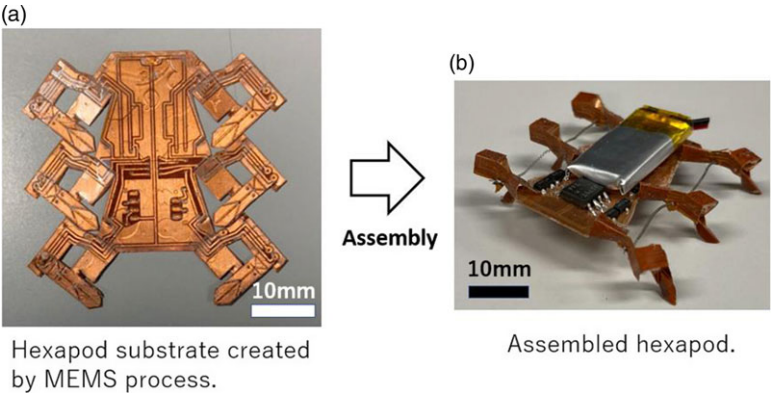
SU-8 board assembly. (a) SU-8 board (b) Assembled hexapod.
